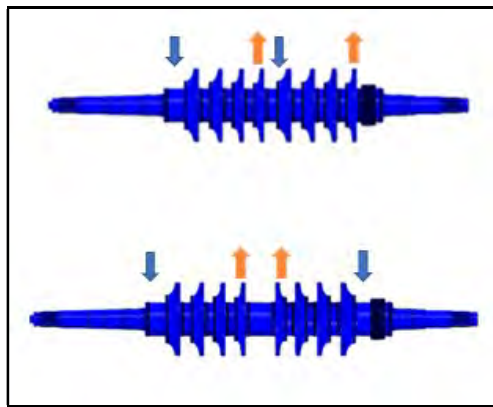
Modular Rotors, Straight-through and Back-to-Back versions, with direction of flow depicted
